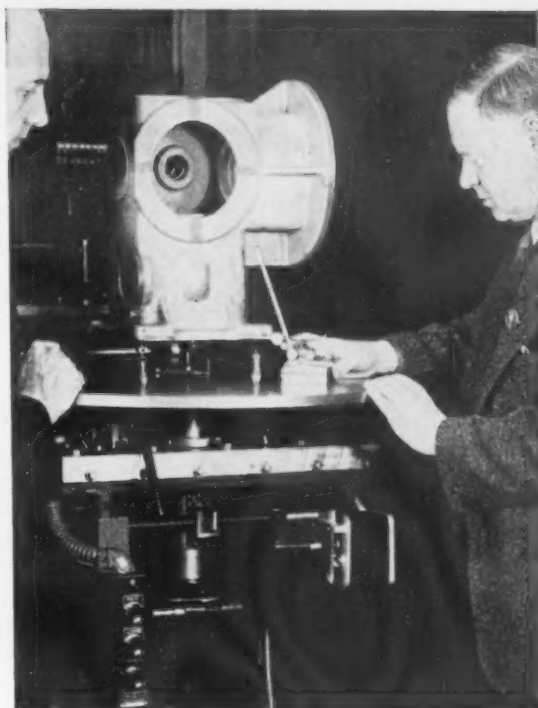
The casting inspection pedestal. A motor drive is used to raise and lower the platform.
